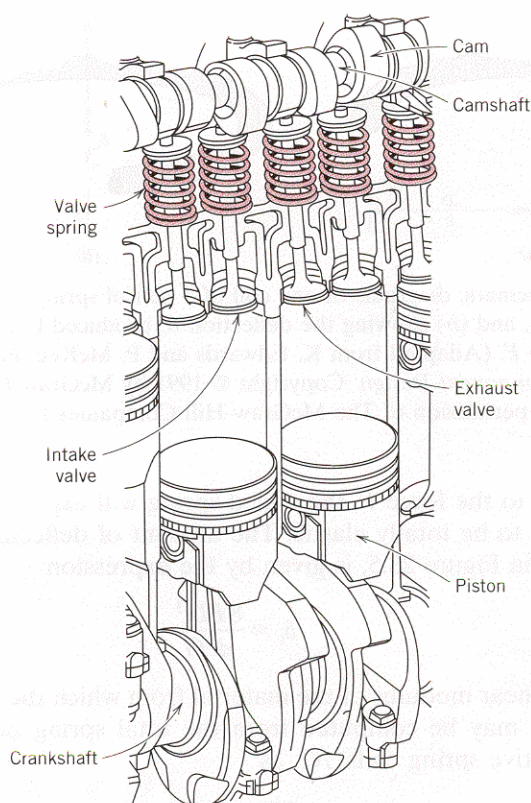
Cutaway drawing of a section of an automobile engine in which various components including valves and valve springs are shown.
